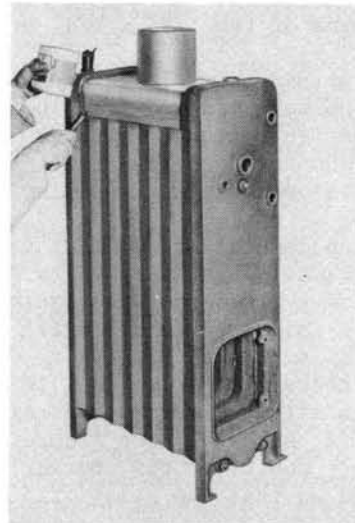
Cementing Flue Header Cover to Heat Exchanger
